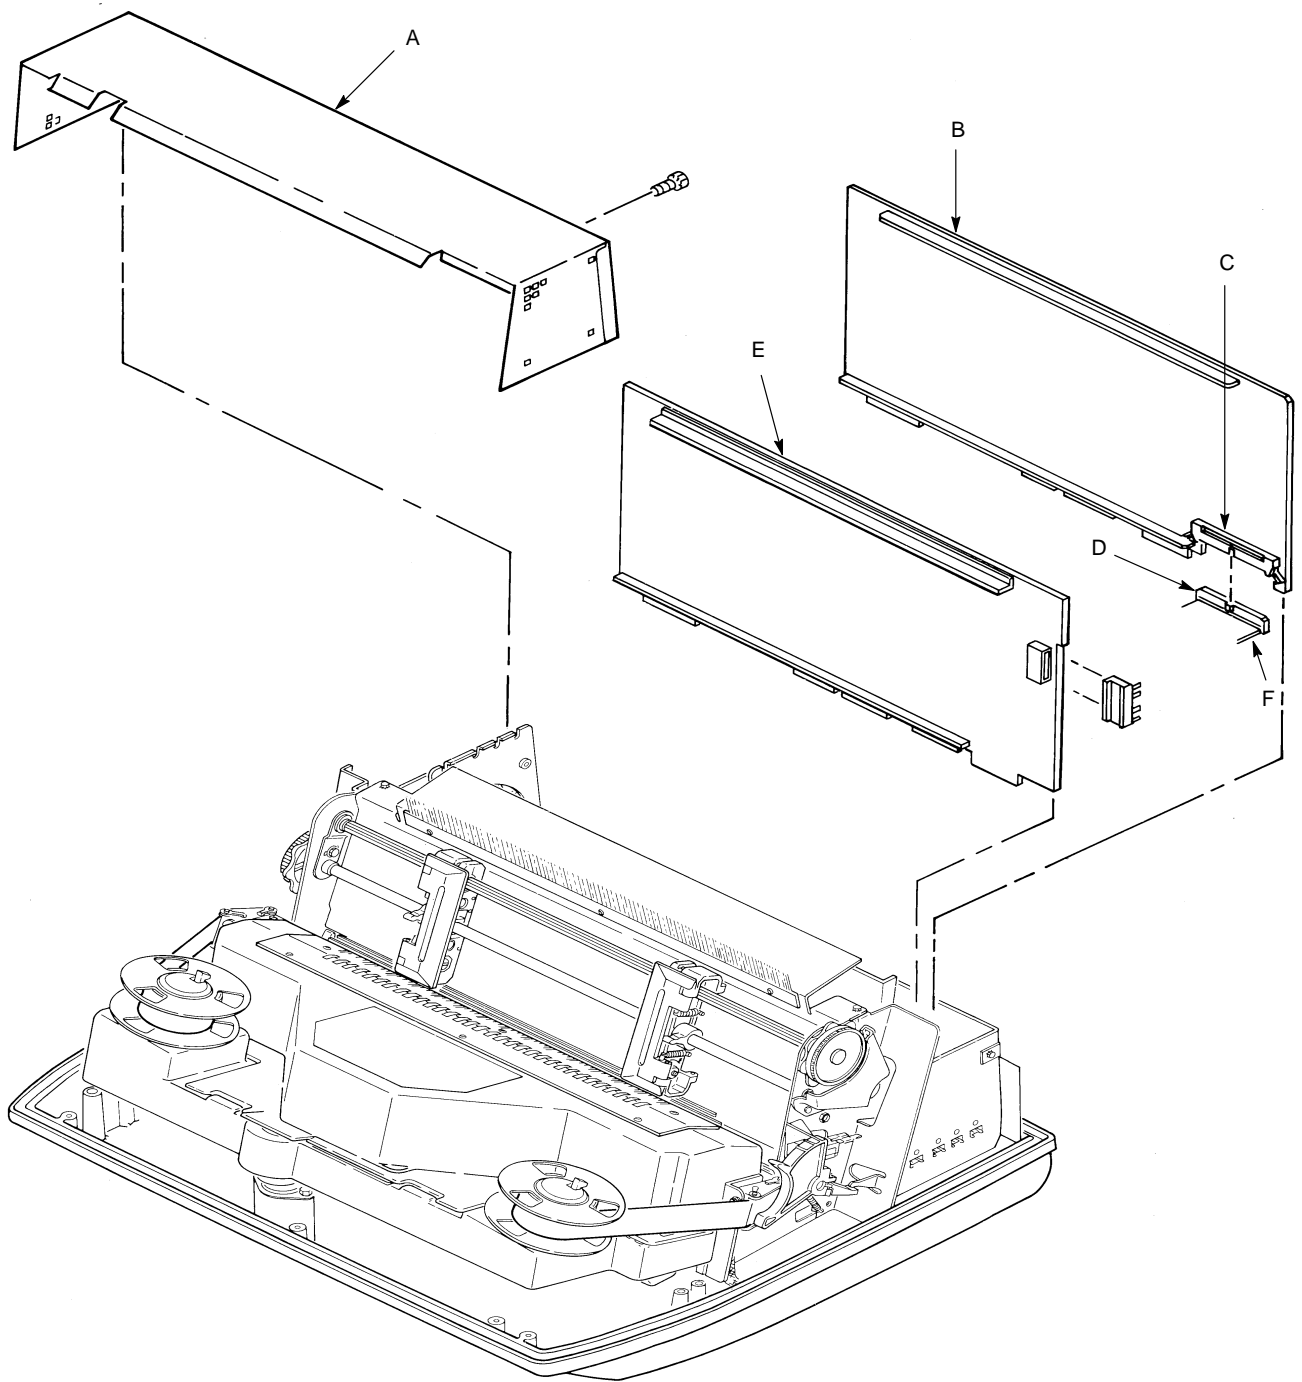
Controller Board Access (Pedestal and Floor Cabinet Models)
